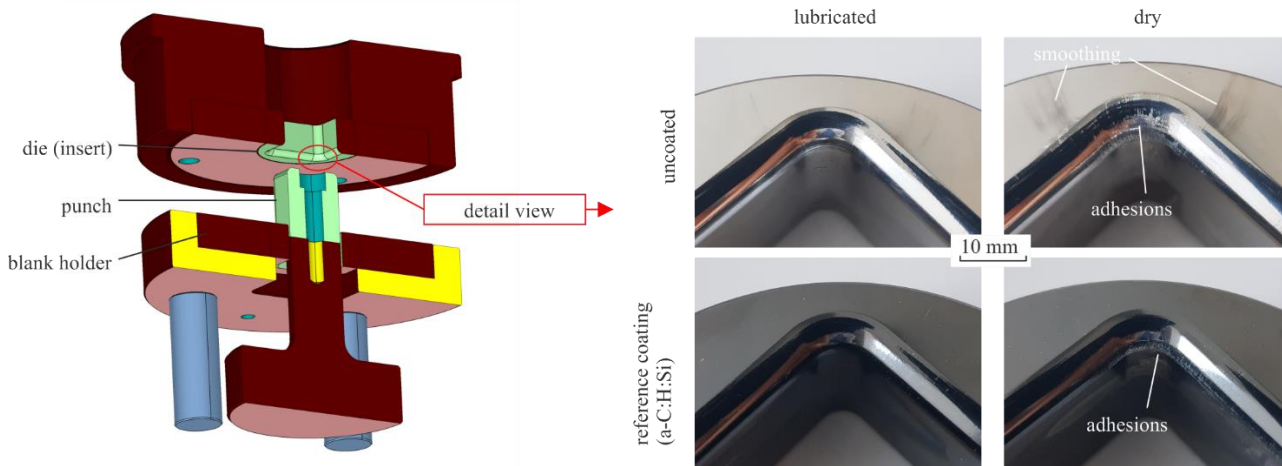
CAD model of the cupping test tool (left) and detailed views of the die inserts after 25 drawn parts (right)
